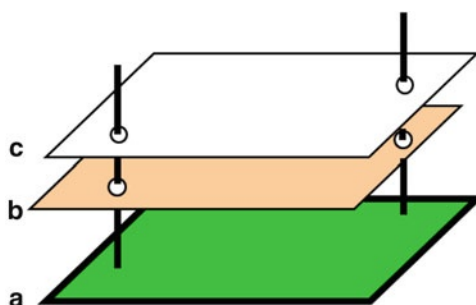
Multilayer LOC assembly: An aligning plate (a) with two pins and two layers to be assembled (b and c).
